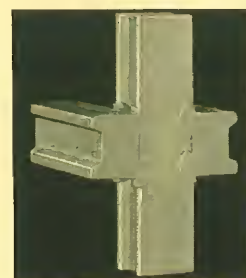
Showing picket and rails after welding has fused them permanently together at eight points.
